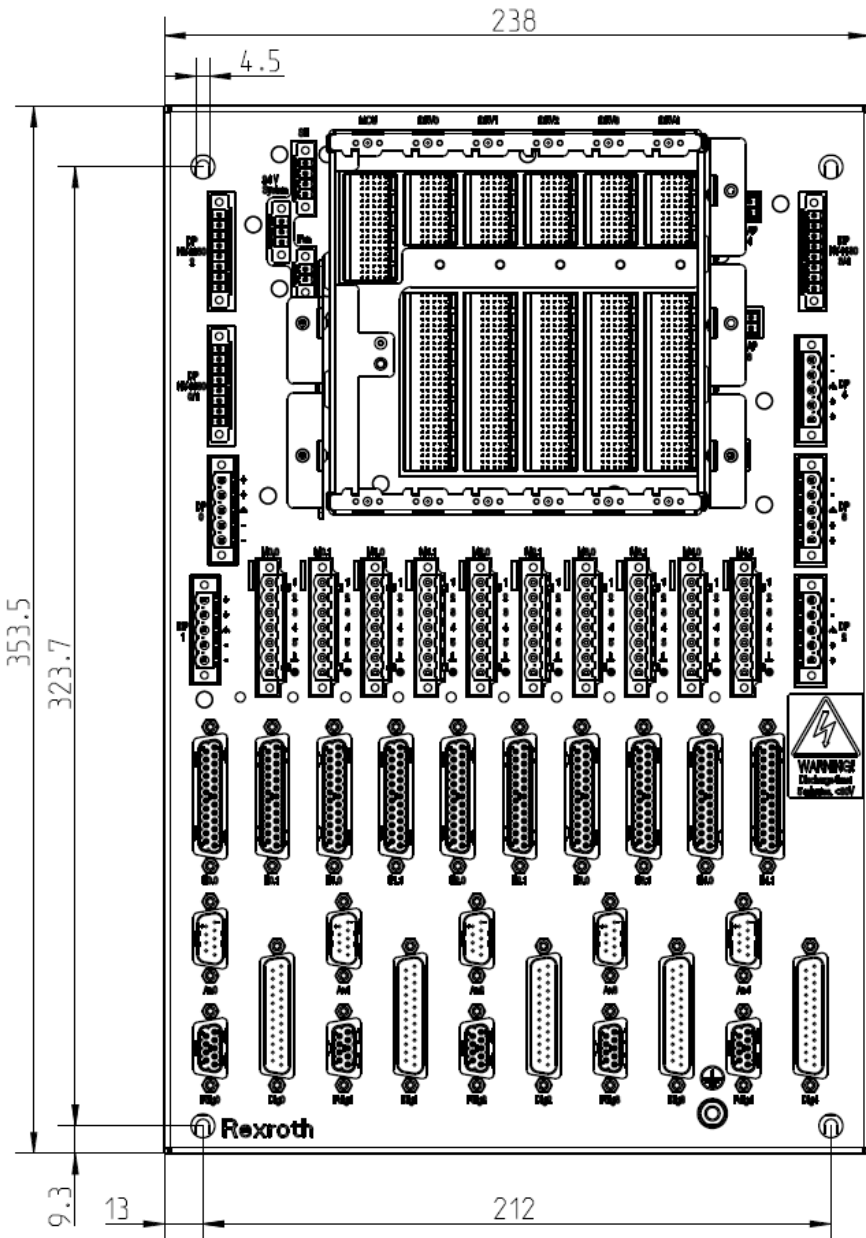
Dimensions (front view) of the NYS04.2-ST-05-ULNN-NY4053
